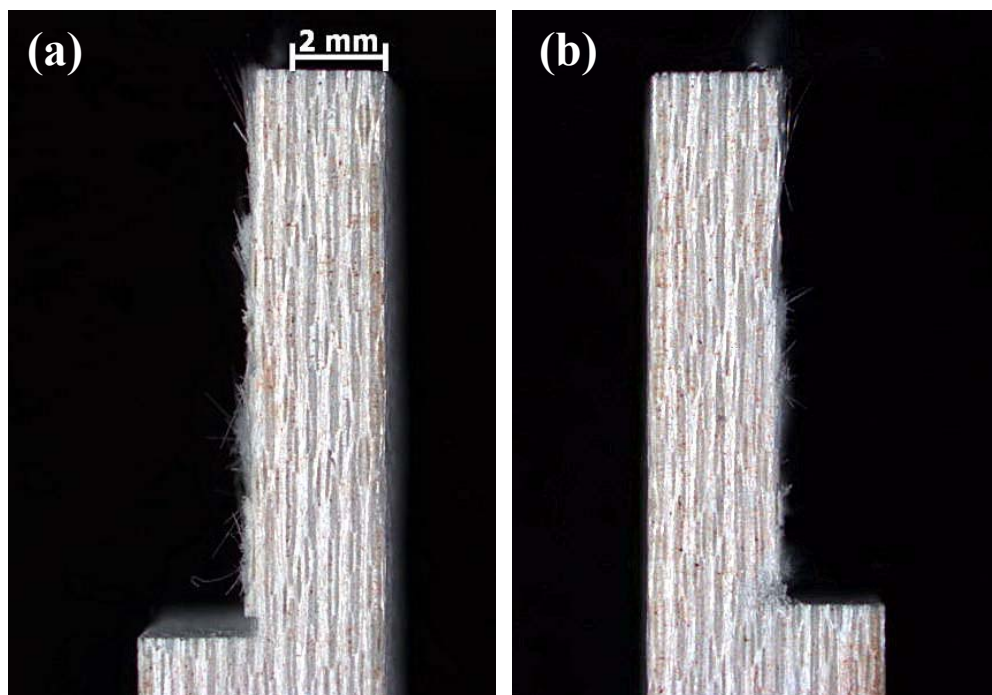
Side views of fracture surfaces of N720/A specimen tested in tension to failure at 1200 °C in air. (a) is of Piece A. (b) is of Piece B.
